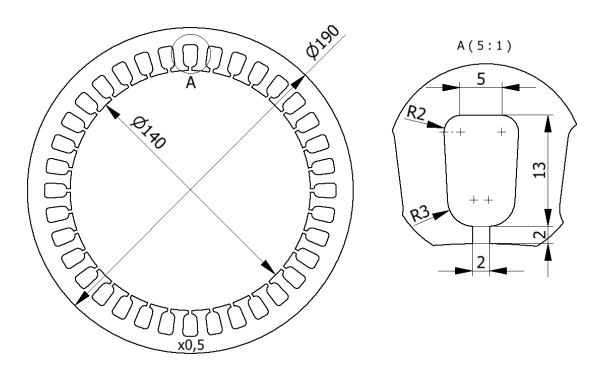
Torsional Generator and Main Motor Stator Sheet & Stator Slot Dimensions
